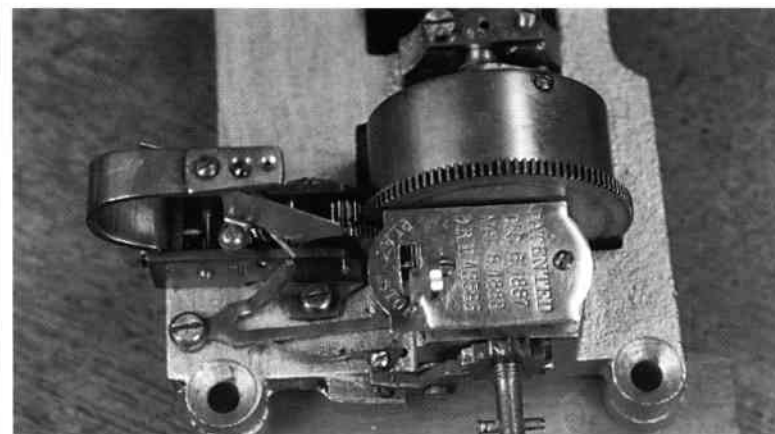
From the top:- cylinder bearing with oil hole, fixing screw, and grub screw for adjustment. Set screw in rim of spring barrel for accurate location. Play/Stop lever with escutcheon listing Mermod patents. Ratchet wheel. Extended spring arbor with pin for crank handle. Also, pivoted near the bedplate edge, the stop lever. Its raised finger has contacted the governor stop arm. The other finger, flat on the bedplate, is sprung against the spring barrel when the lever is set to Stop.
